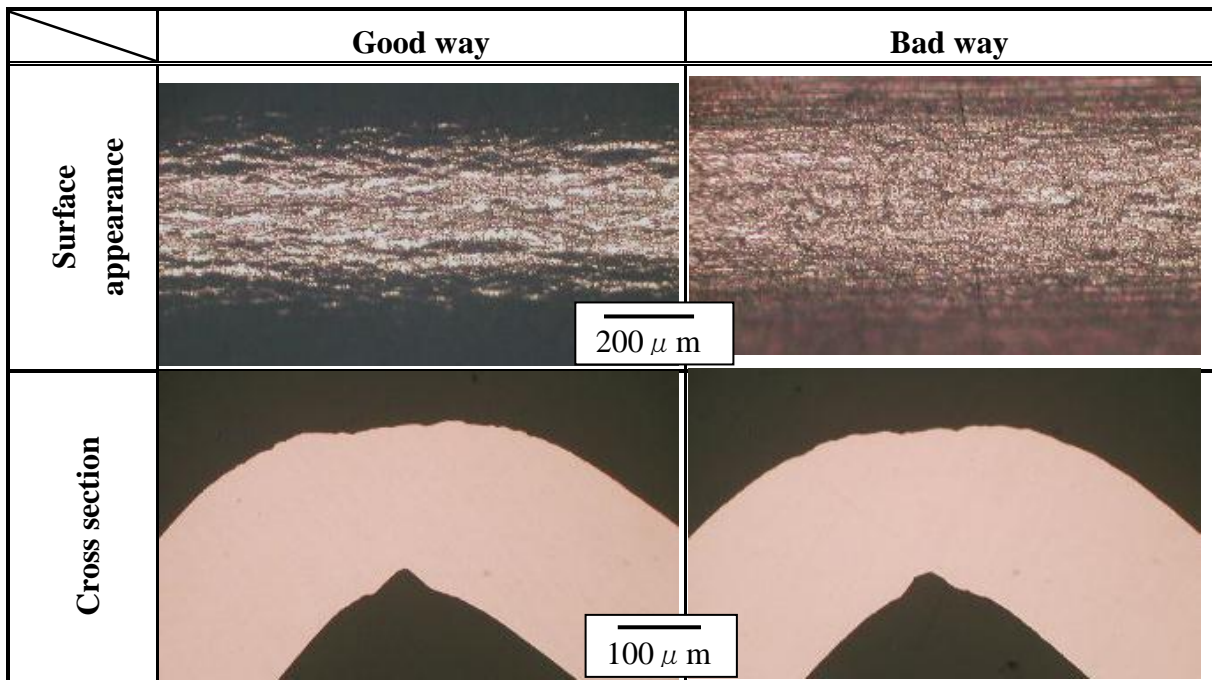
Surface appearances and cross sections of 90° W-shaped bending test specimens.
